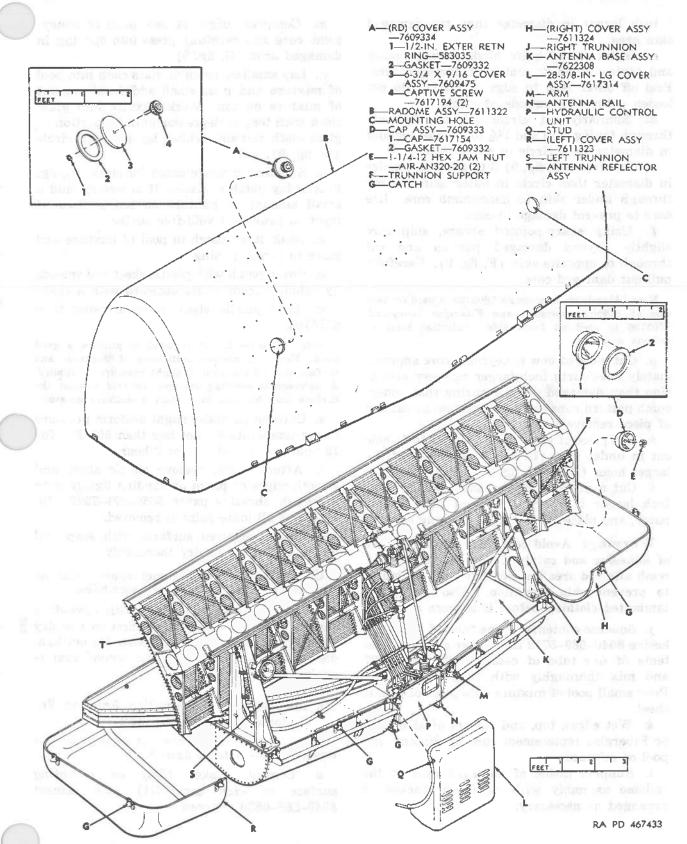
Removal and installation of acquisition antenna radome assembly and cover assemblies.
